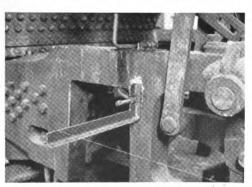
Bracket holding one end of line for testing alignment of a locomotive frame.
